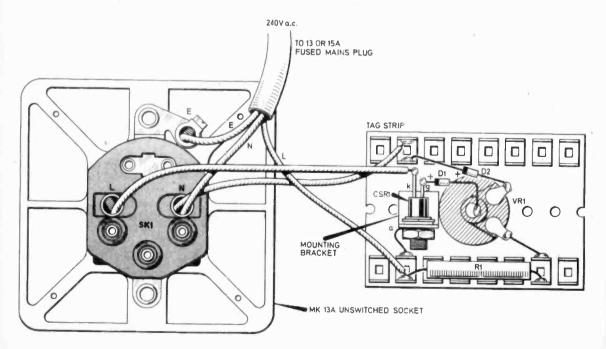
Complete layout and wiring of the Drill Speed Controller.
